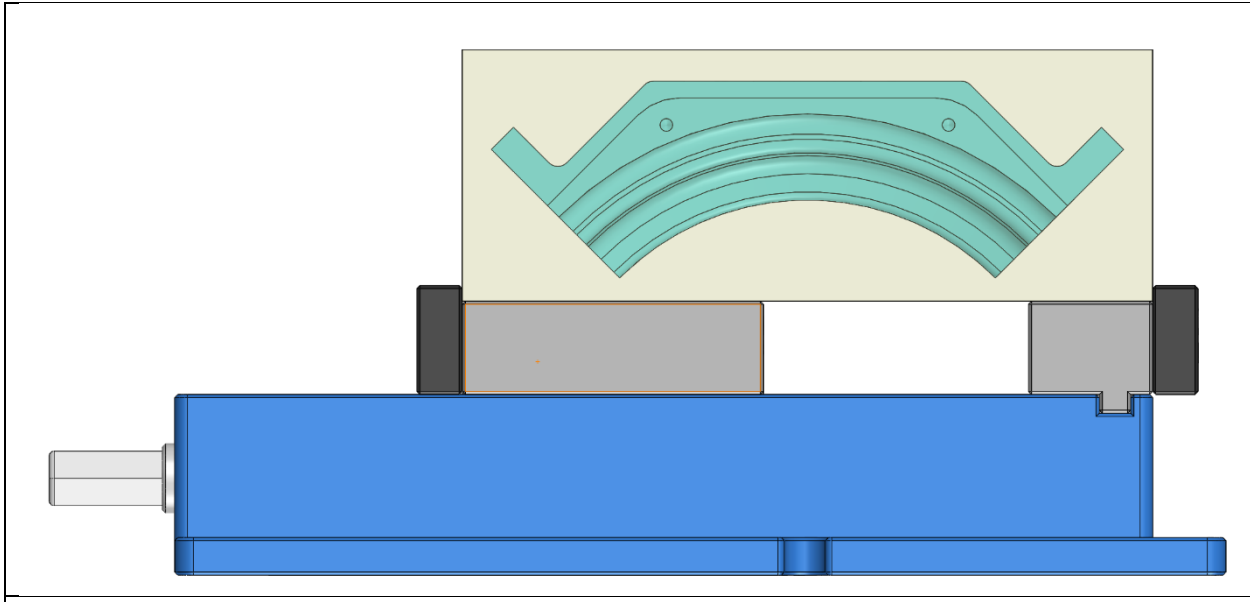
Side view of setup for Op 1. Stock is shown here in yellow.
